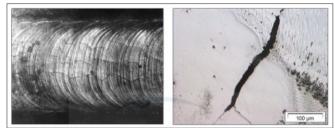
Hot cracks in fully austenitic weld metal cladding and welded joint between austenitic stainless steel and Nickel-based Alloy [5]
